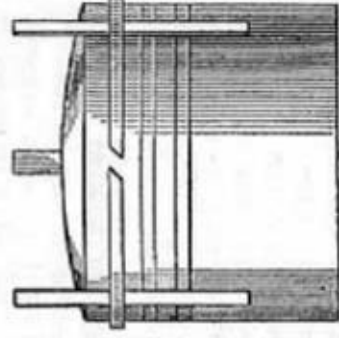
THE SAFEST METHOD OF REMOVING PISTON RINGS
